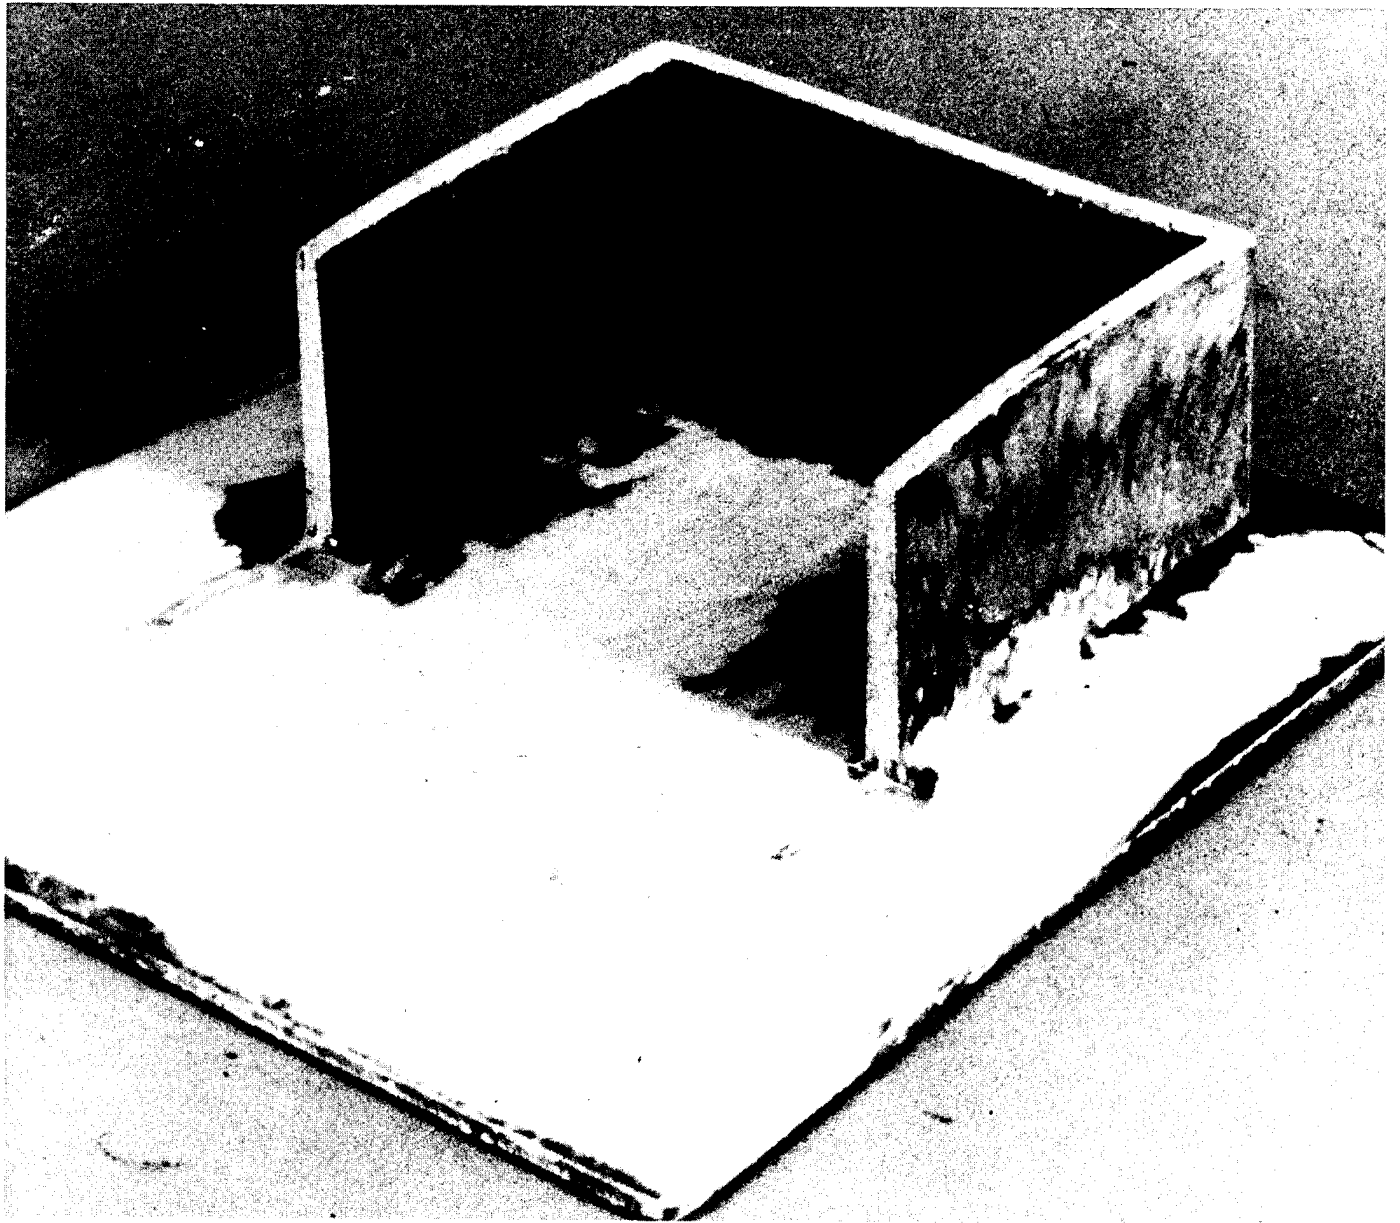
MOLDED RIB POCKET USED IN
